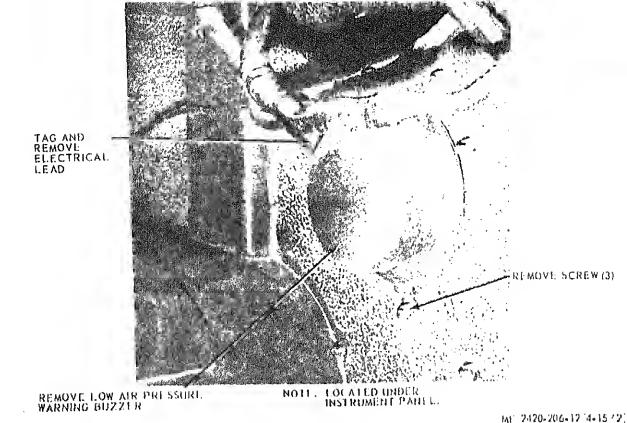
Controls and instruments, removal and installation, (sheet 2 of 10).
